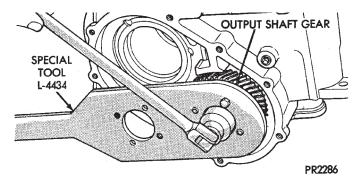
Remove Output Shaft Retaining Nut and Washer
